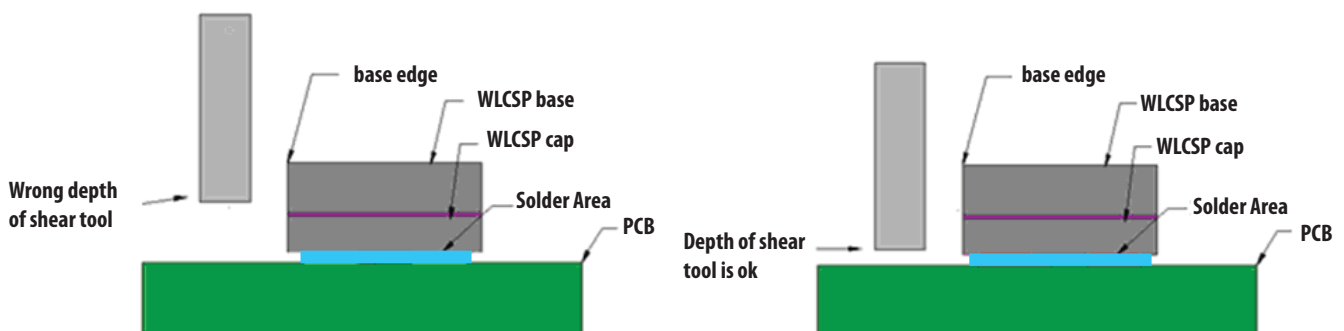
Die shear tool set-up showing desired (right) vs undesired (left) tool location
